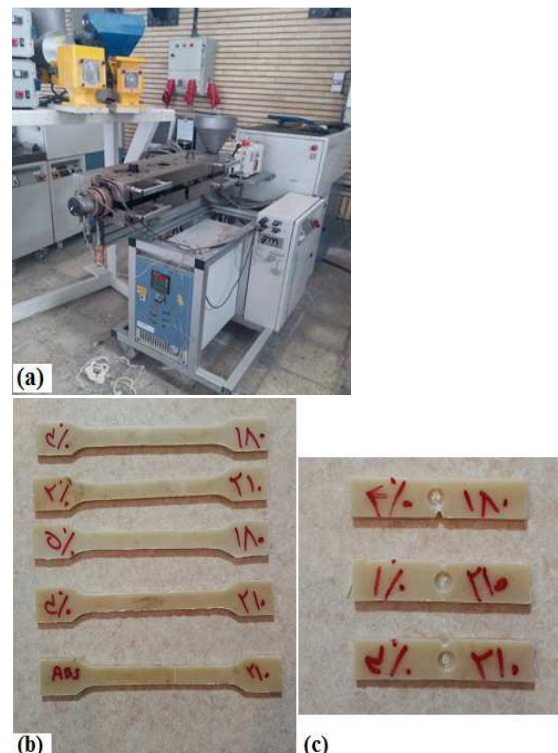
Extrusion machine (a), prepared samples for tensile tests (b), prepared samples for impact tests (c)
